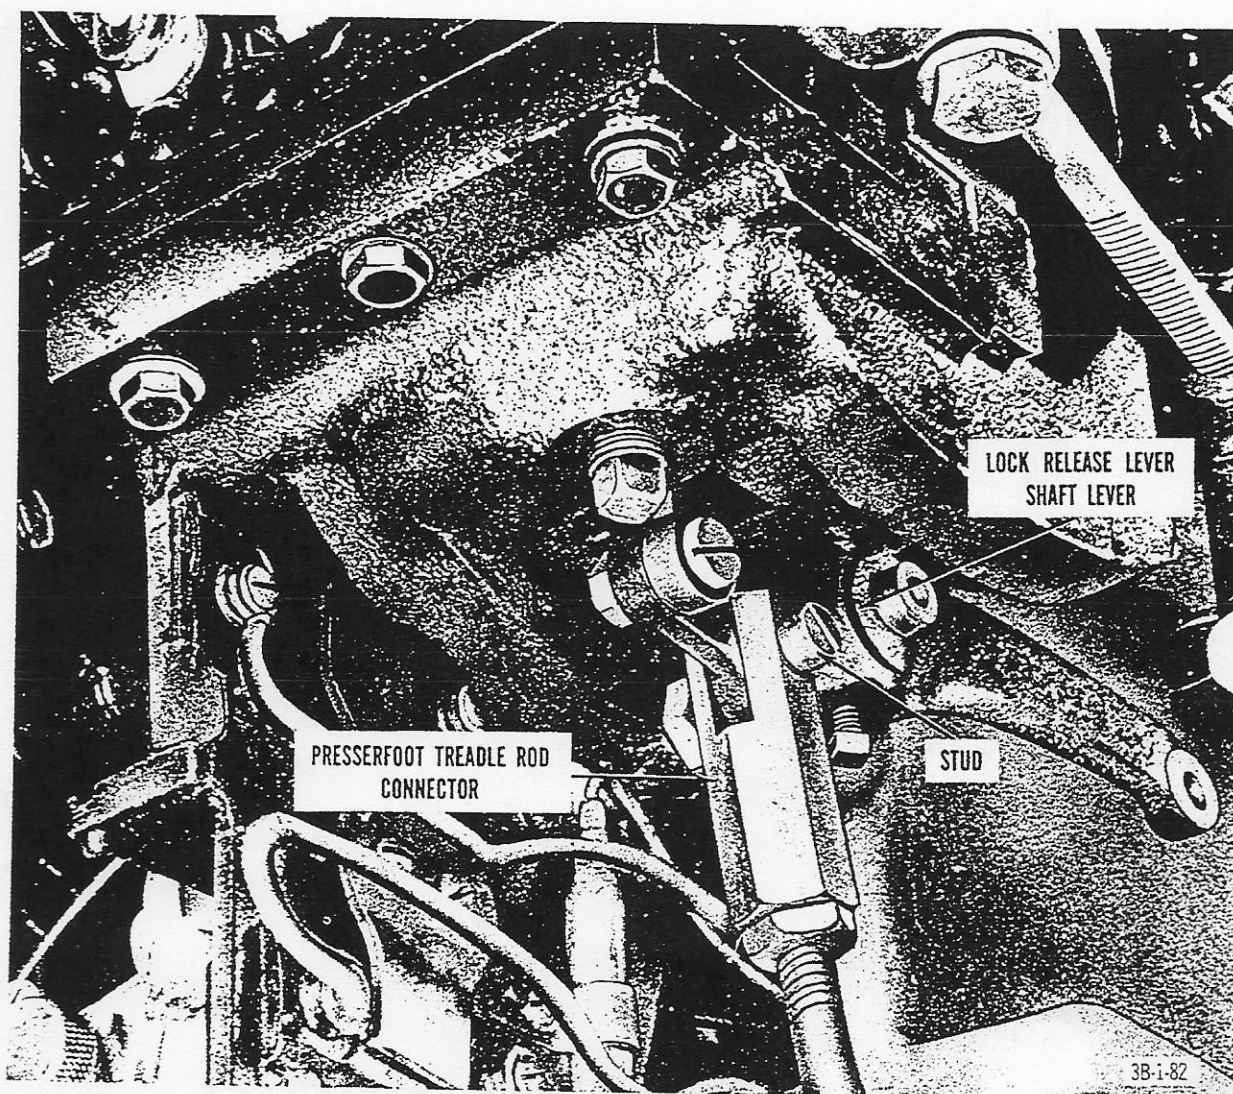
Treadle rod connector installed on lock release lever shaft lever
